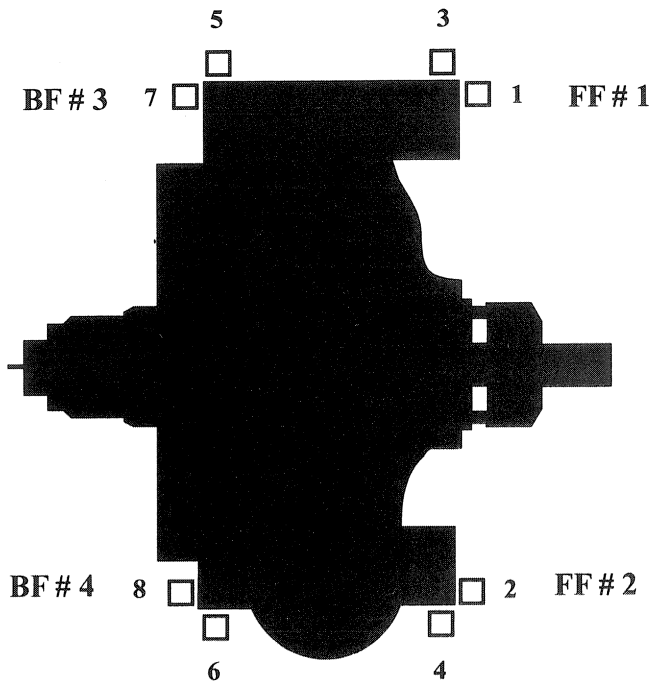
Pump Foot/Jacking Bolt Labeling for Soft Foot Test.
